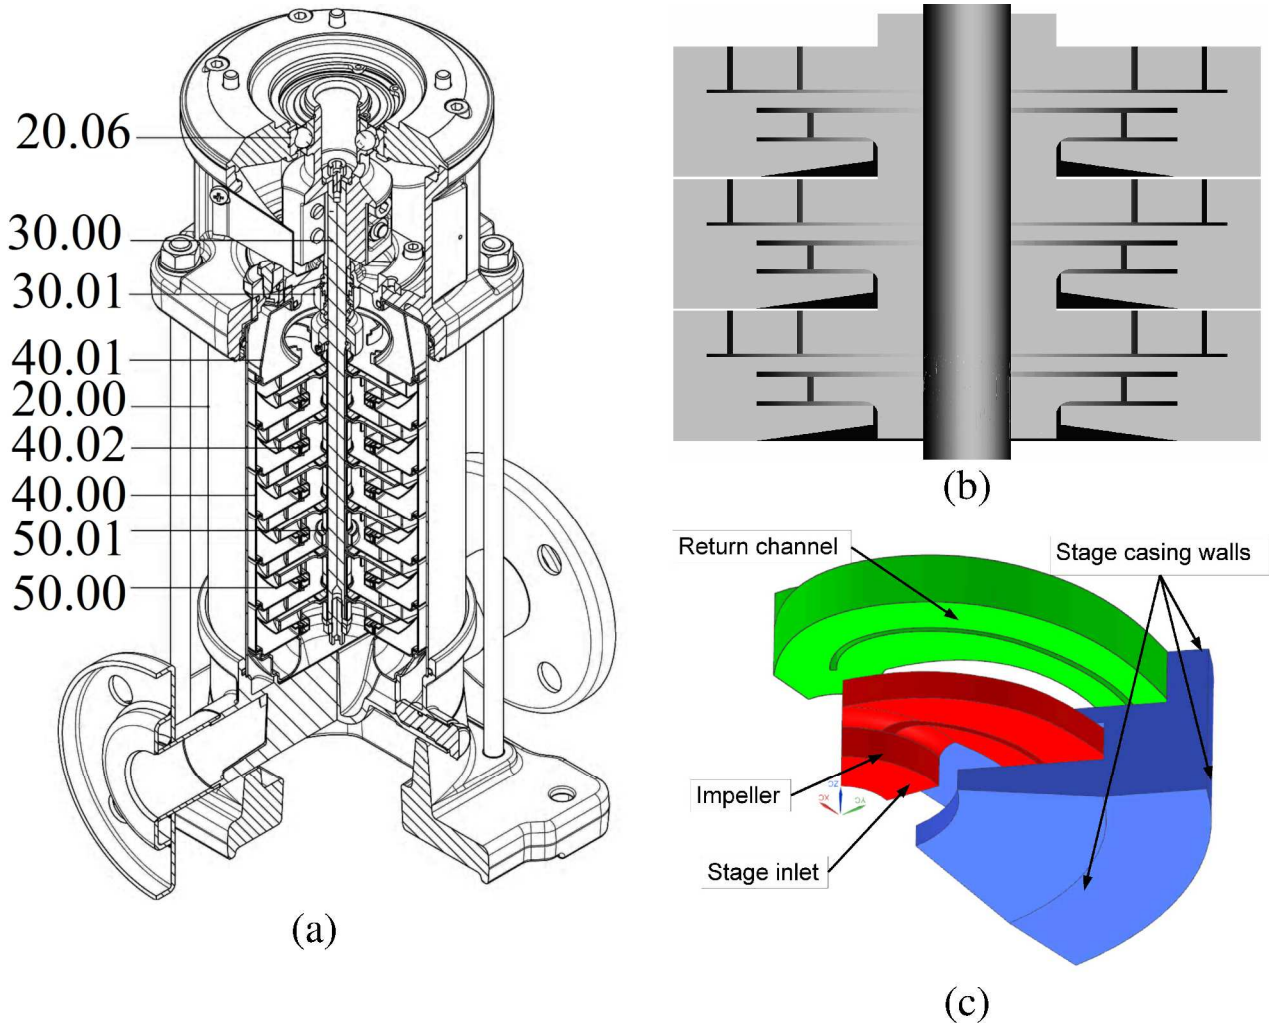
The pump under analysis: a) view of the multistage pump assembly, b) schematic view of a three-stage assembly, c) geometrical model of the fluid volumes of one impeller channel and one return channel.
